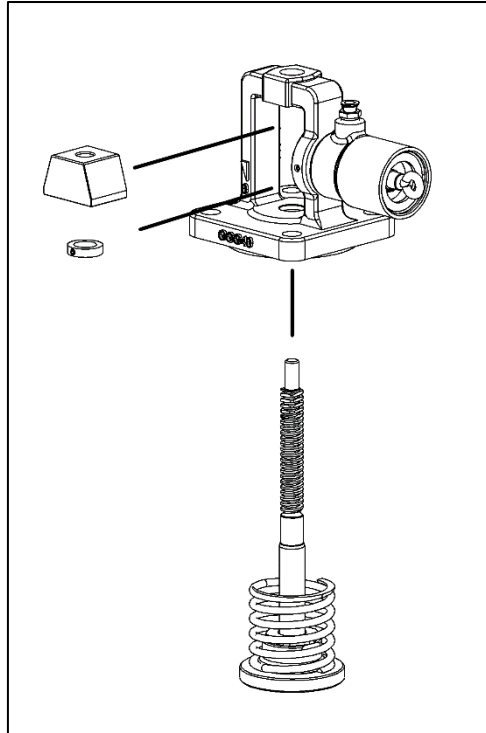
Remove setting nut and indication nut to be able to remove stem from bonnet.
